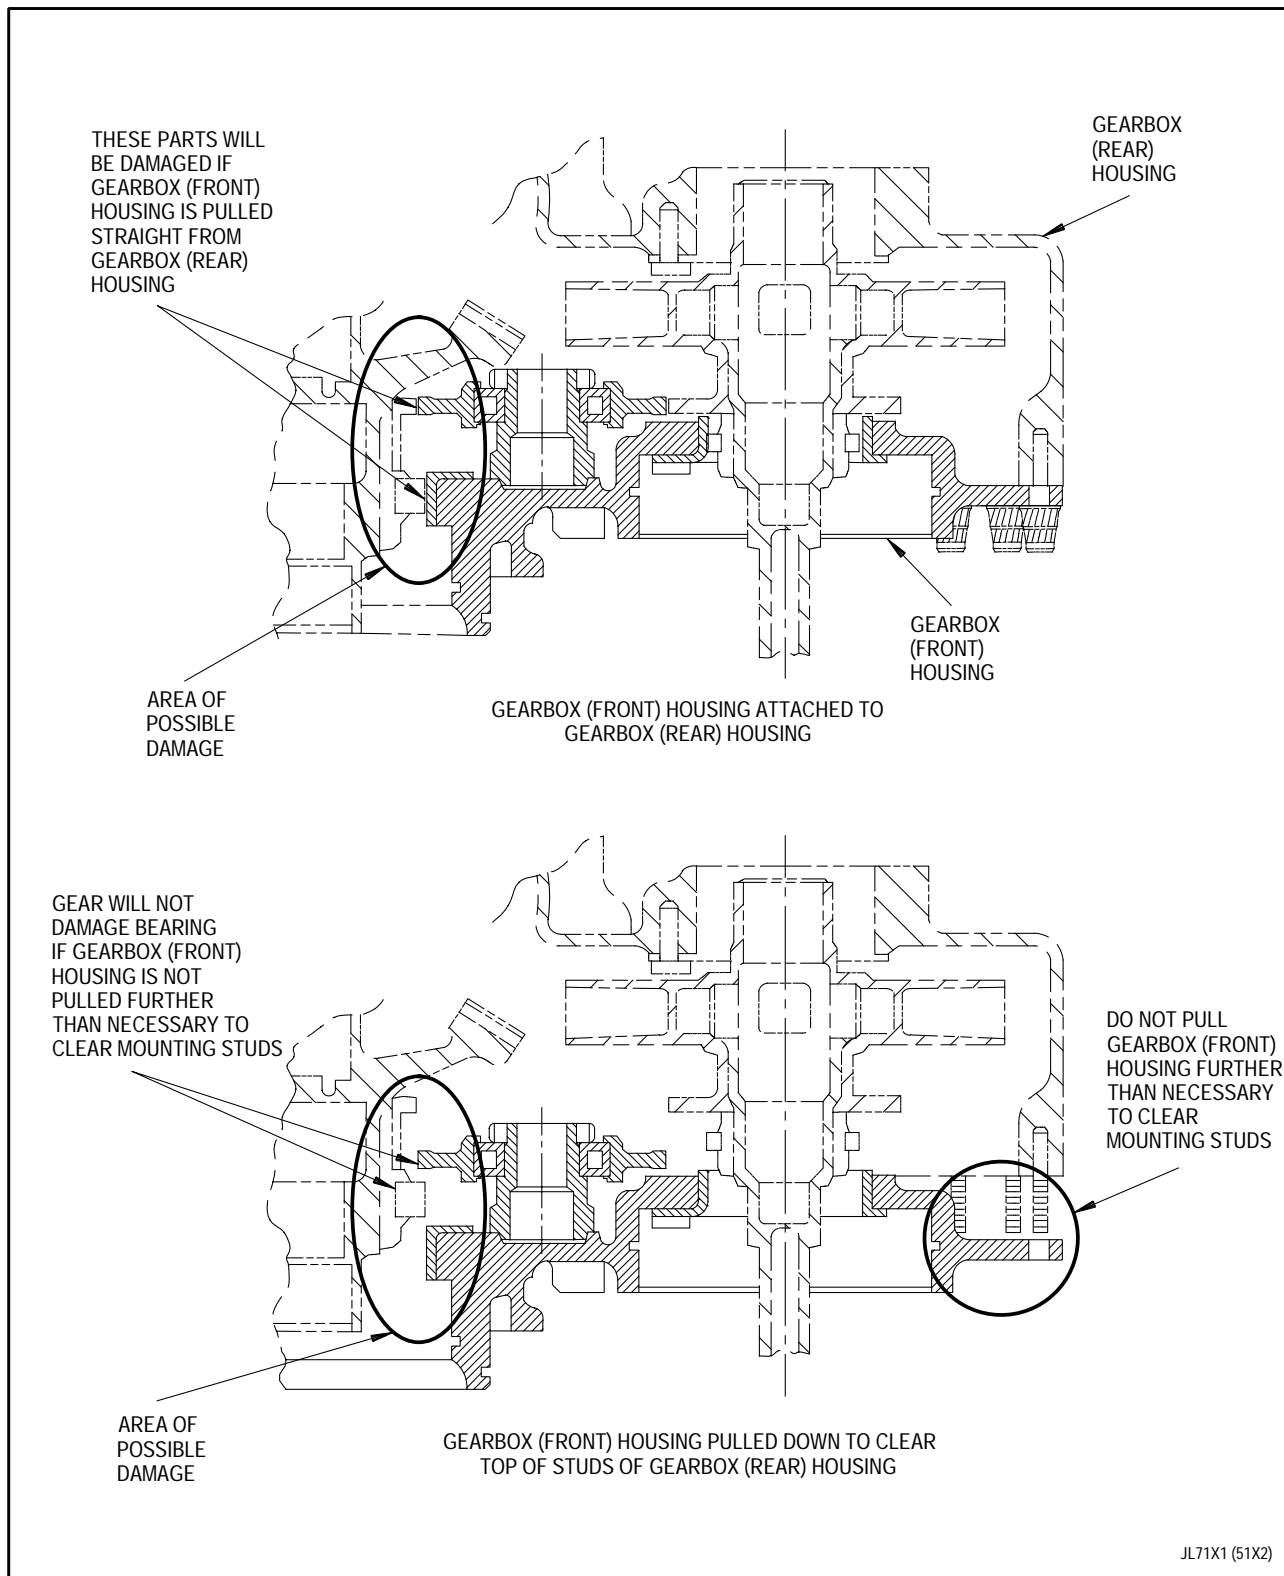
Removal of Gearbox (Front) Housing from Gearbox (Rear) Housing (Sheet 1 of 2)
